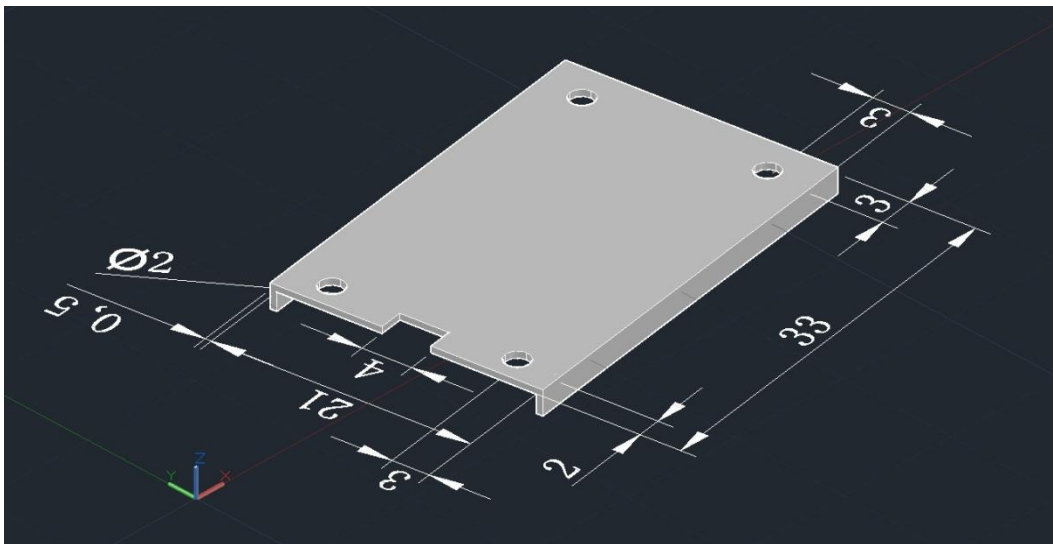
Dimensions of the top plate of phantom holder. The plate is made of plexiglass.
